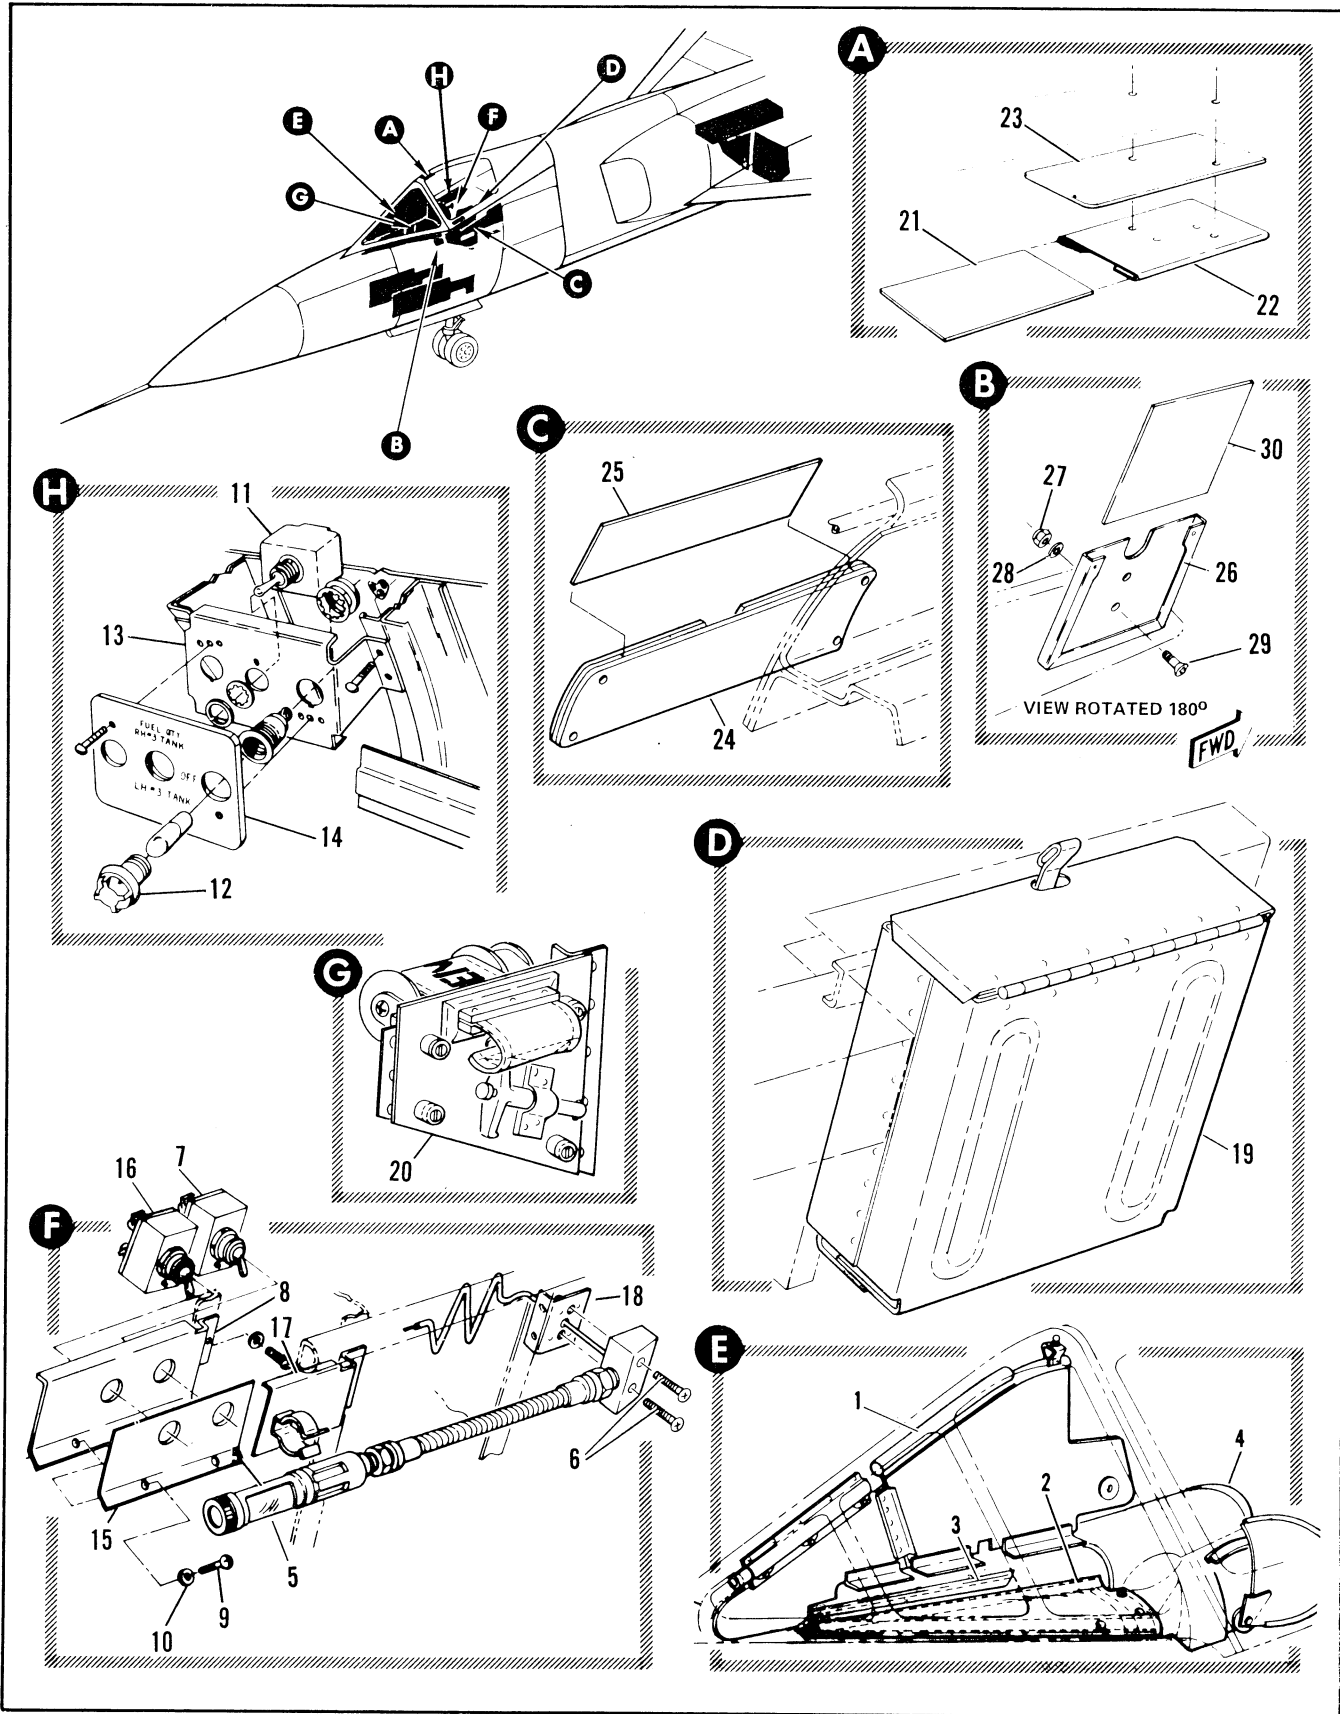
Furnishings (Sheet 1 of 2)
